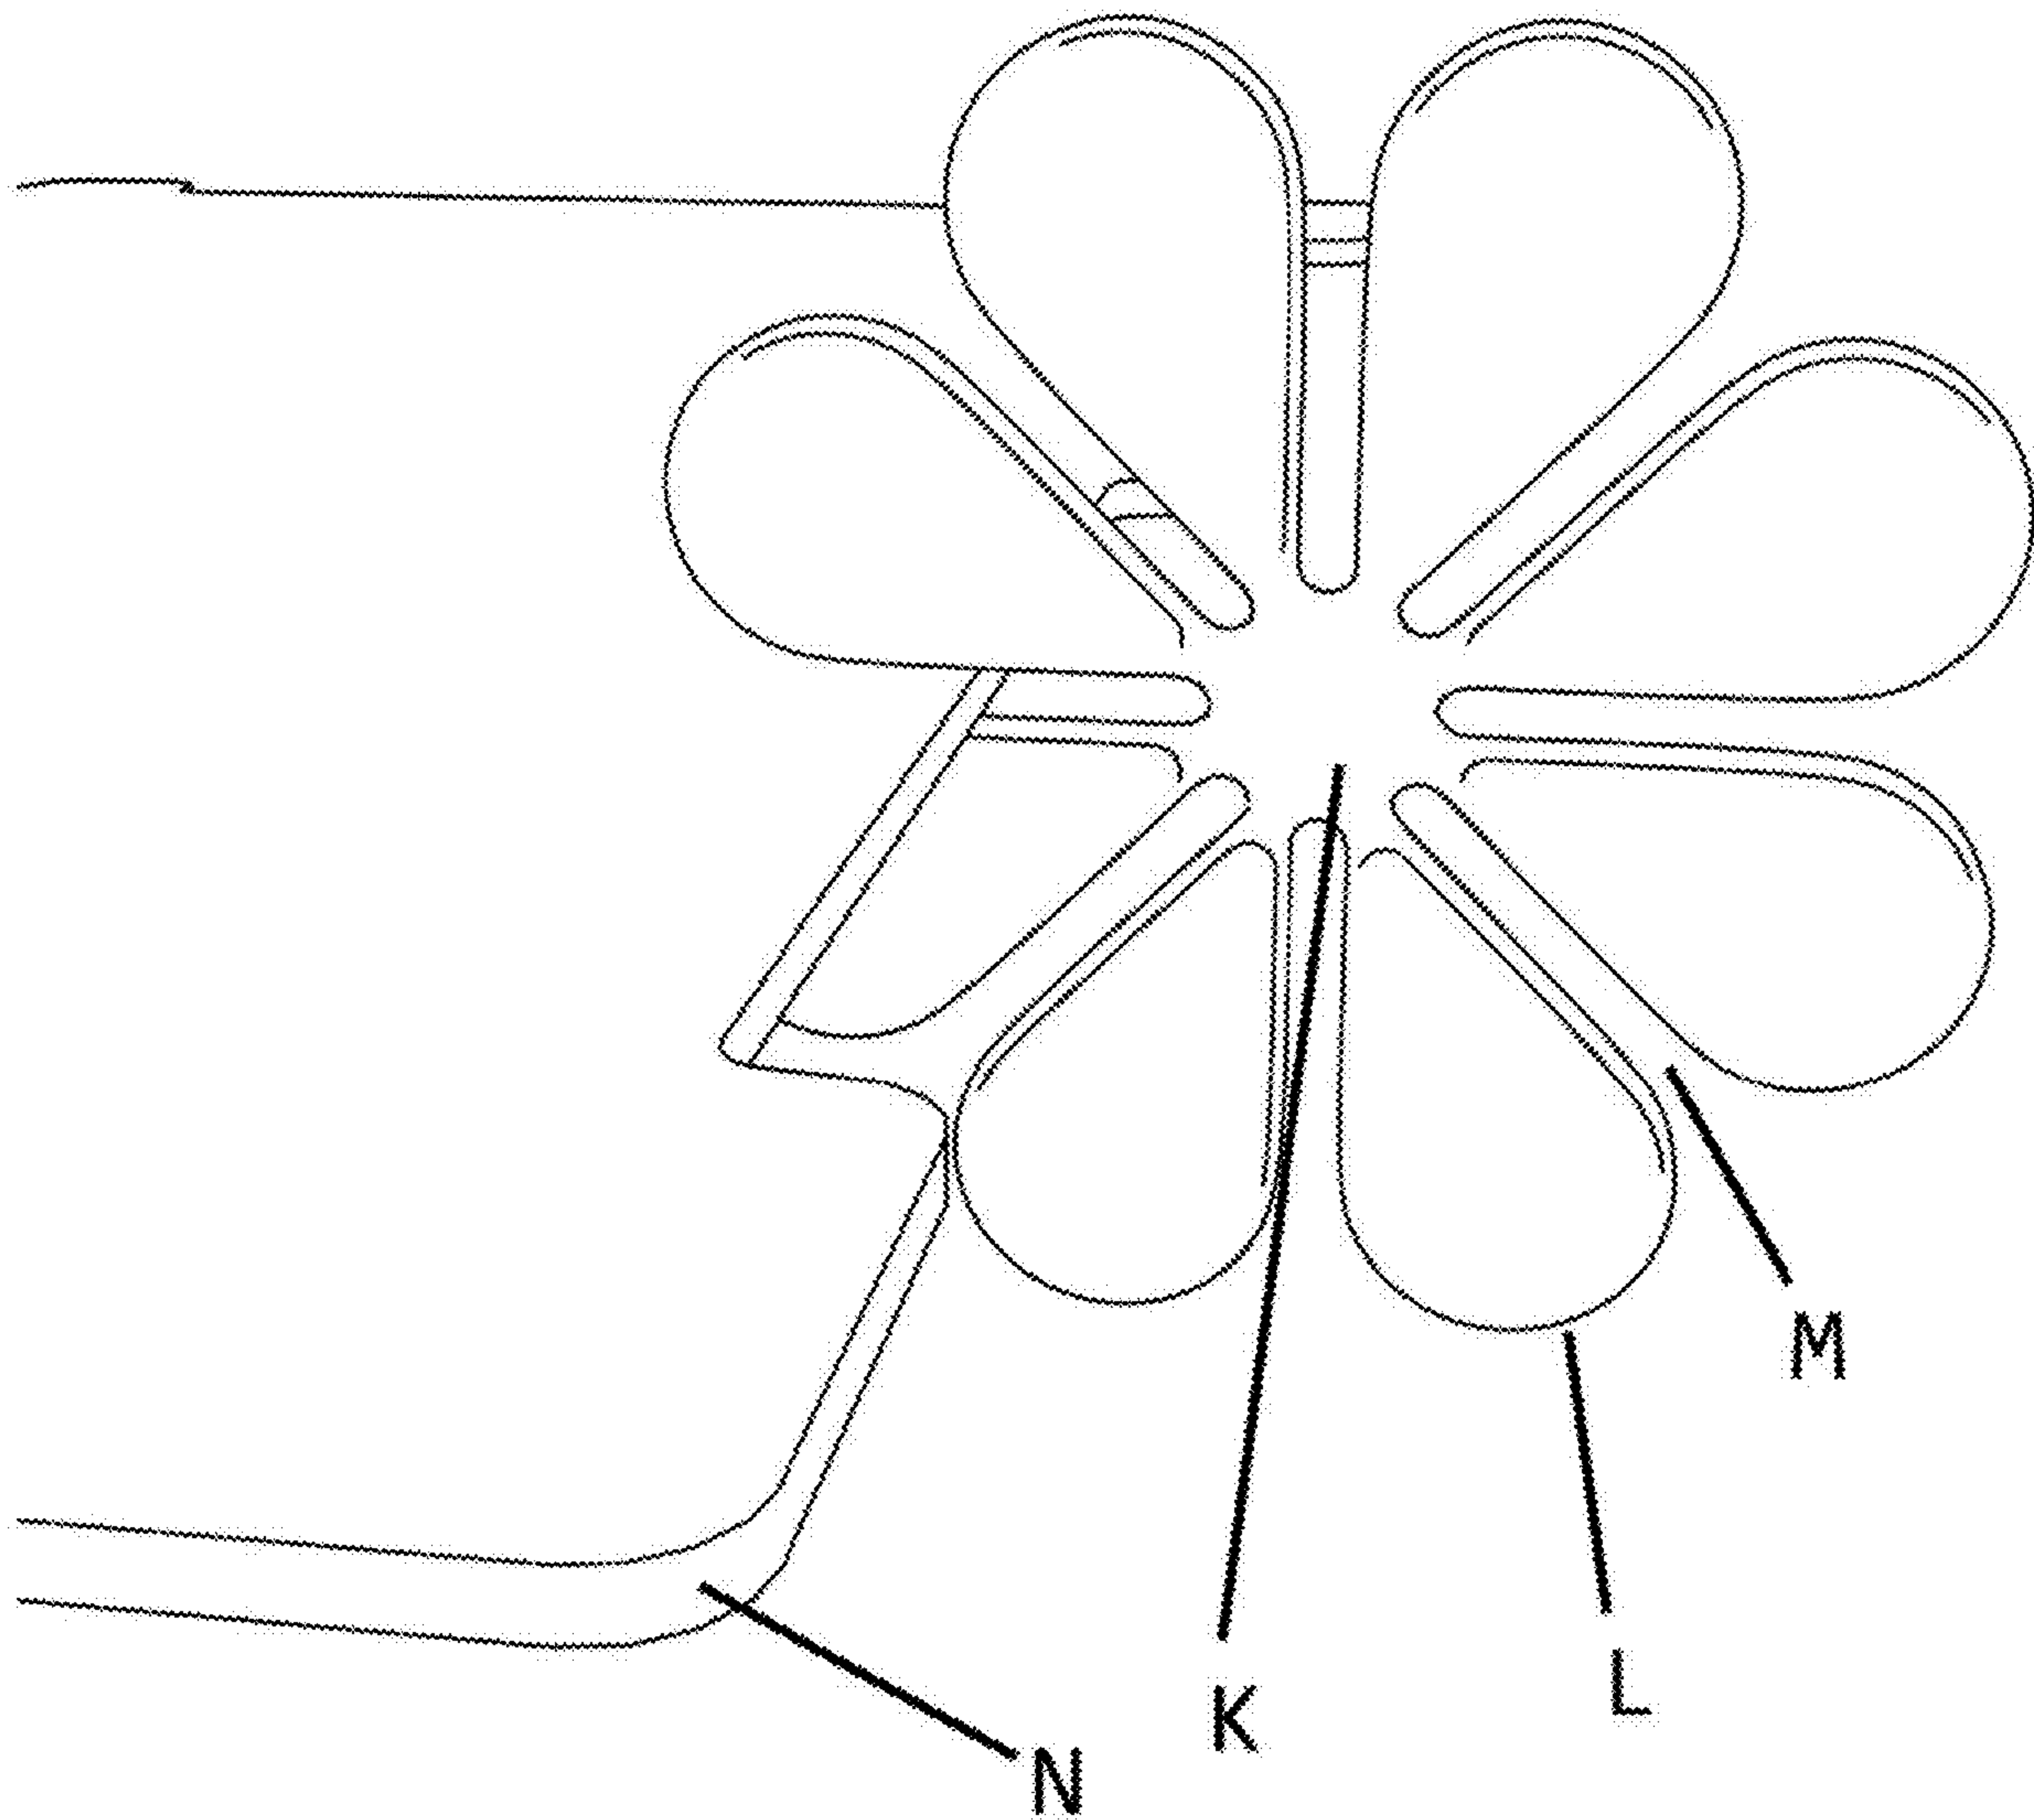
View depicting how Connecting Element slots slip onto Planar Element
